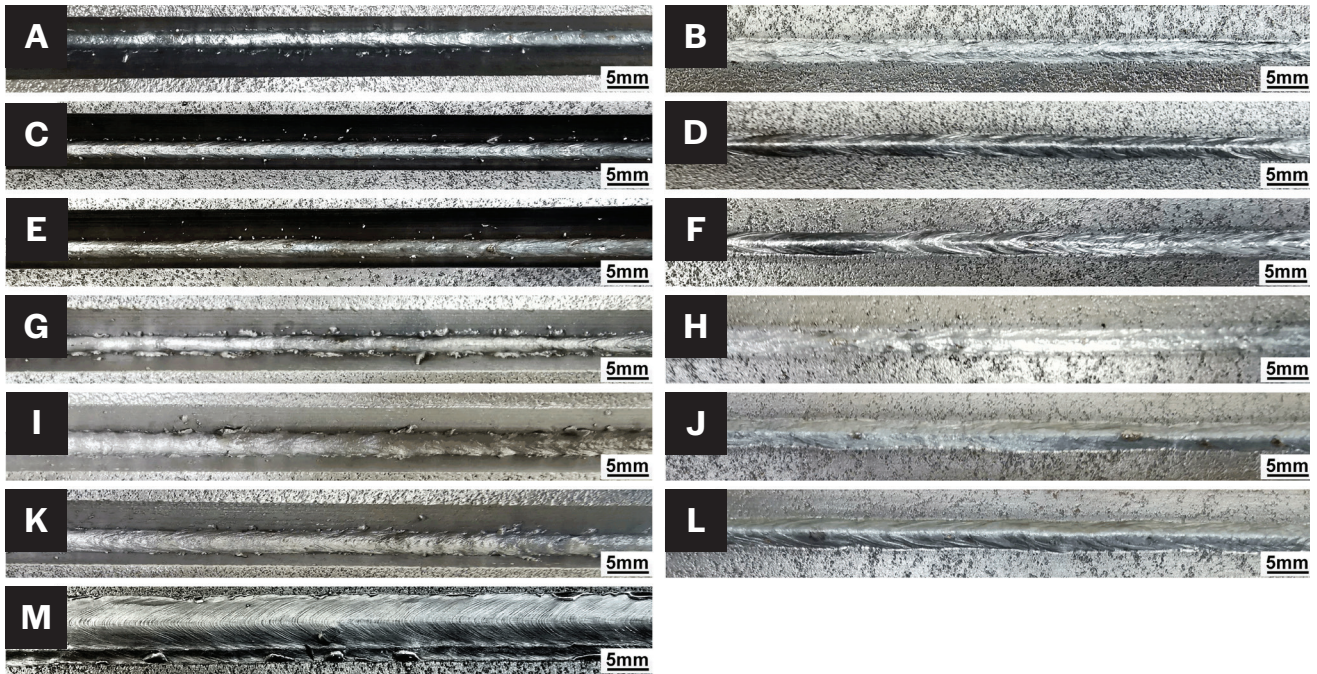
Weld surfaces morphologies: A and B — Top and bottom surfaces of autogenous laser weld; C and D — top and bottom surfaces of cold-wire laser weld with a WFR of 4 m/min; E and F — top and bottom surfaces of cold-wire laser weld with a WFR of 6 m/min; G and H — top and bottom surfaces of hot-wire laser weld with a WFR of 6 m/min; I and J — top and bottom surfaces of cold-wire laser weld with a WFR of 12 m/min; K and L — top and bottom surfaces of hot-wire laser weld with a WFR of 12 m/min; M — top surface of cap arc weld.
